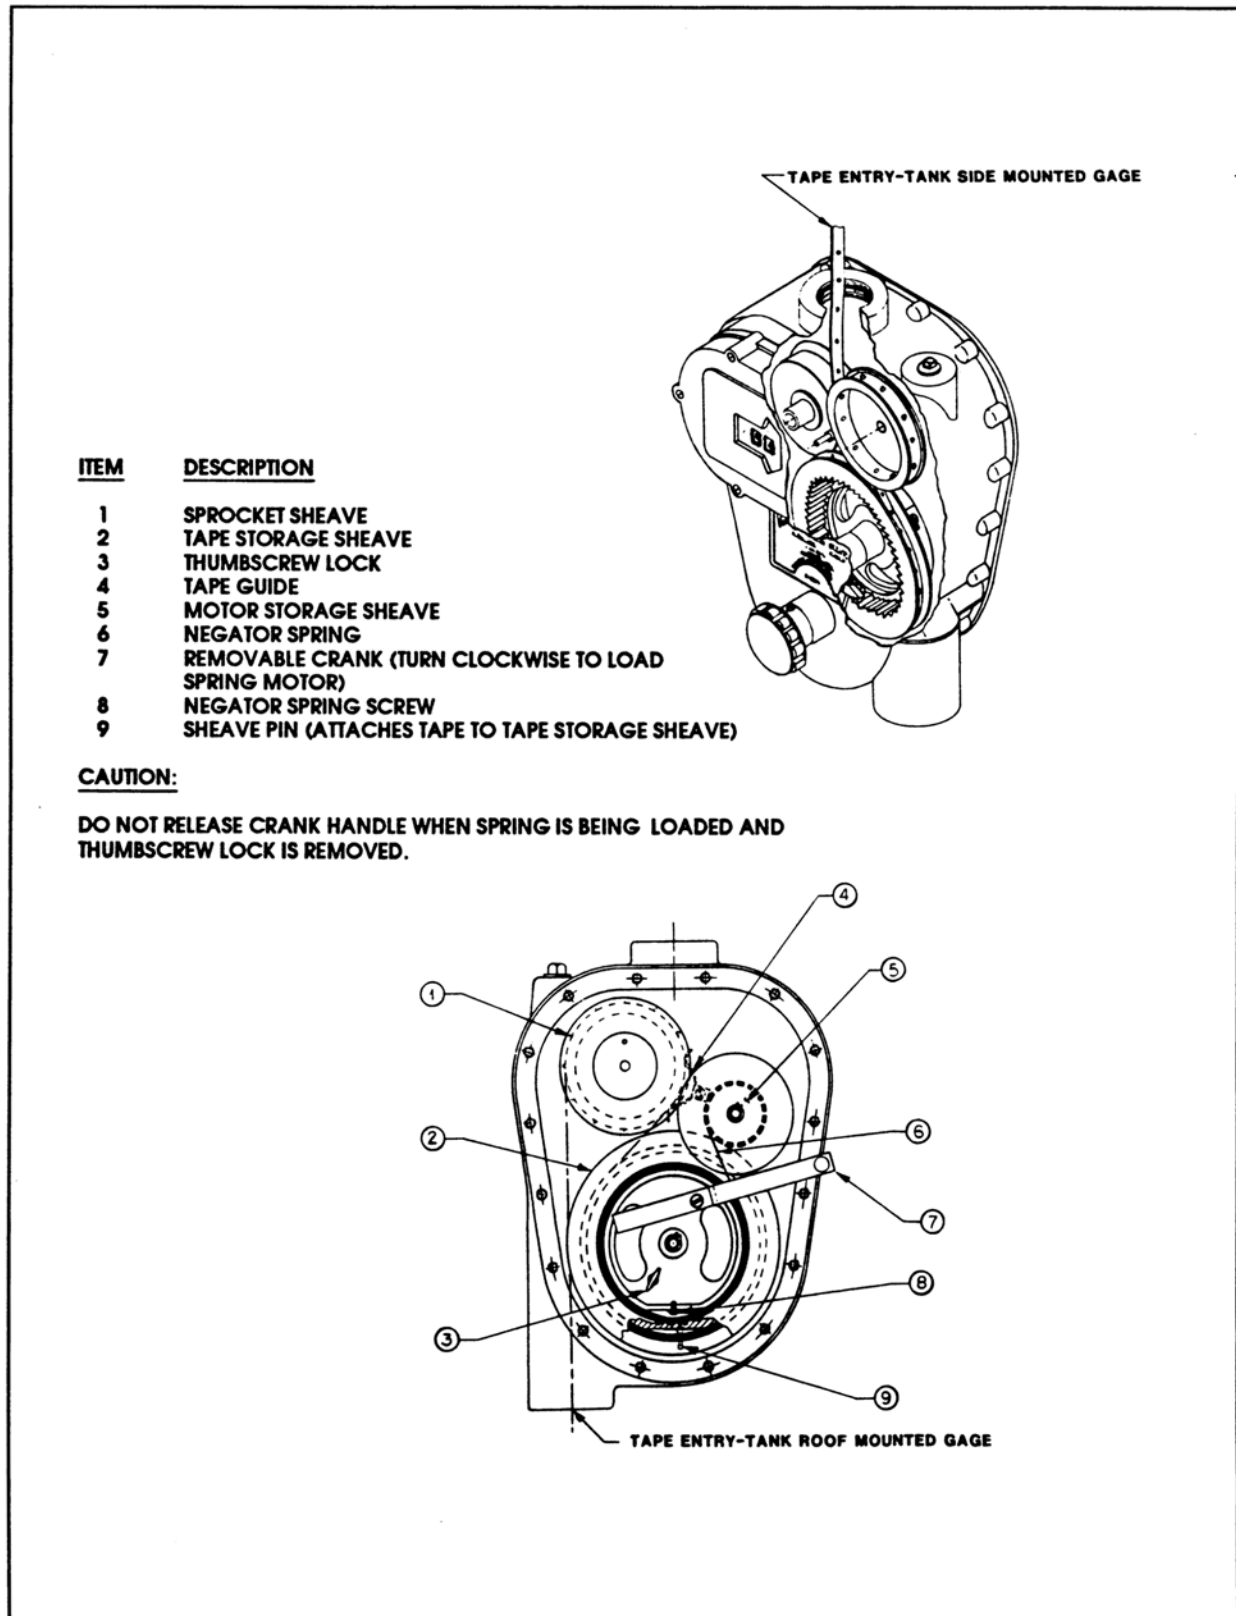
Tape Installation (Low Pressure Gaugehead Shown)
